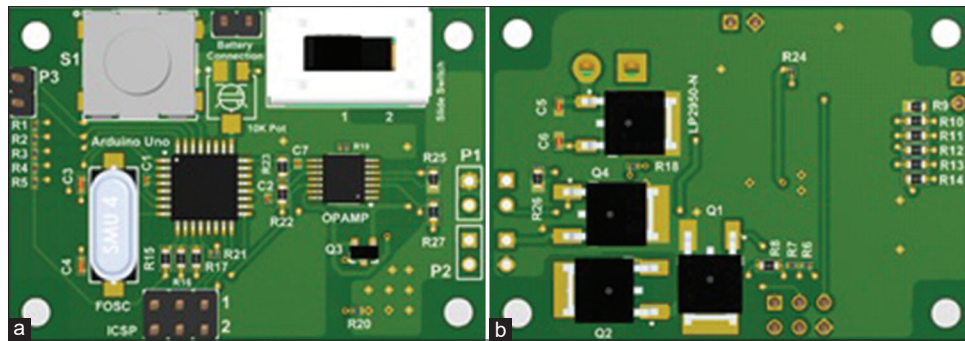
Circuit board with components mounted on (a) Top layer (b) Bottom layer
